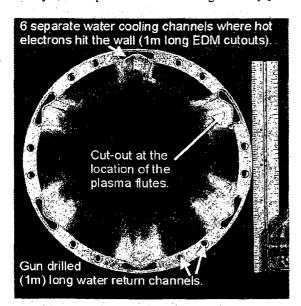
Picture of the VENUS plasma chamber before welding.
